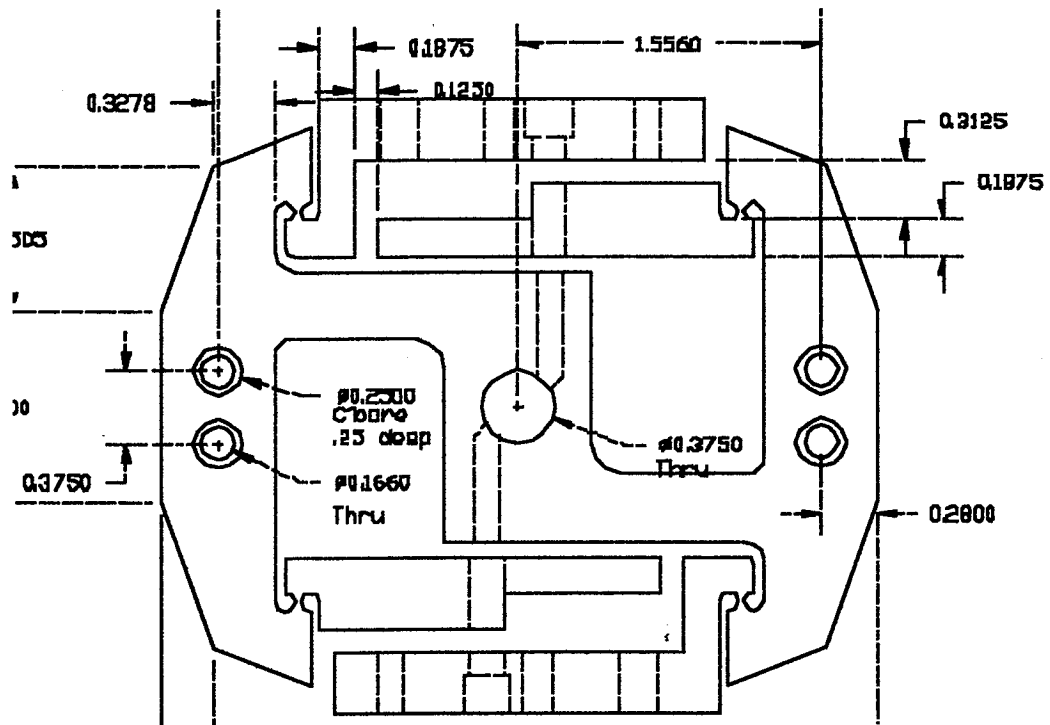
Dimensioned drawing of clamping mechanism, front view.
